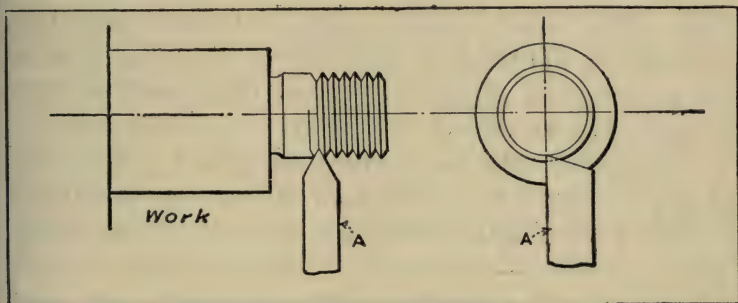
THE SIMPLEST FORM OF THREADING TOOL
